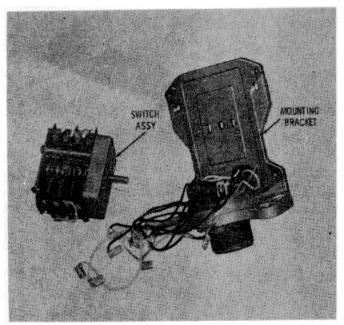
Switch Assembly Removed from Mounting Bracket
